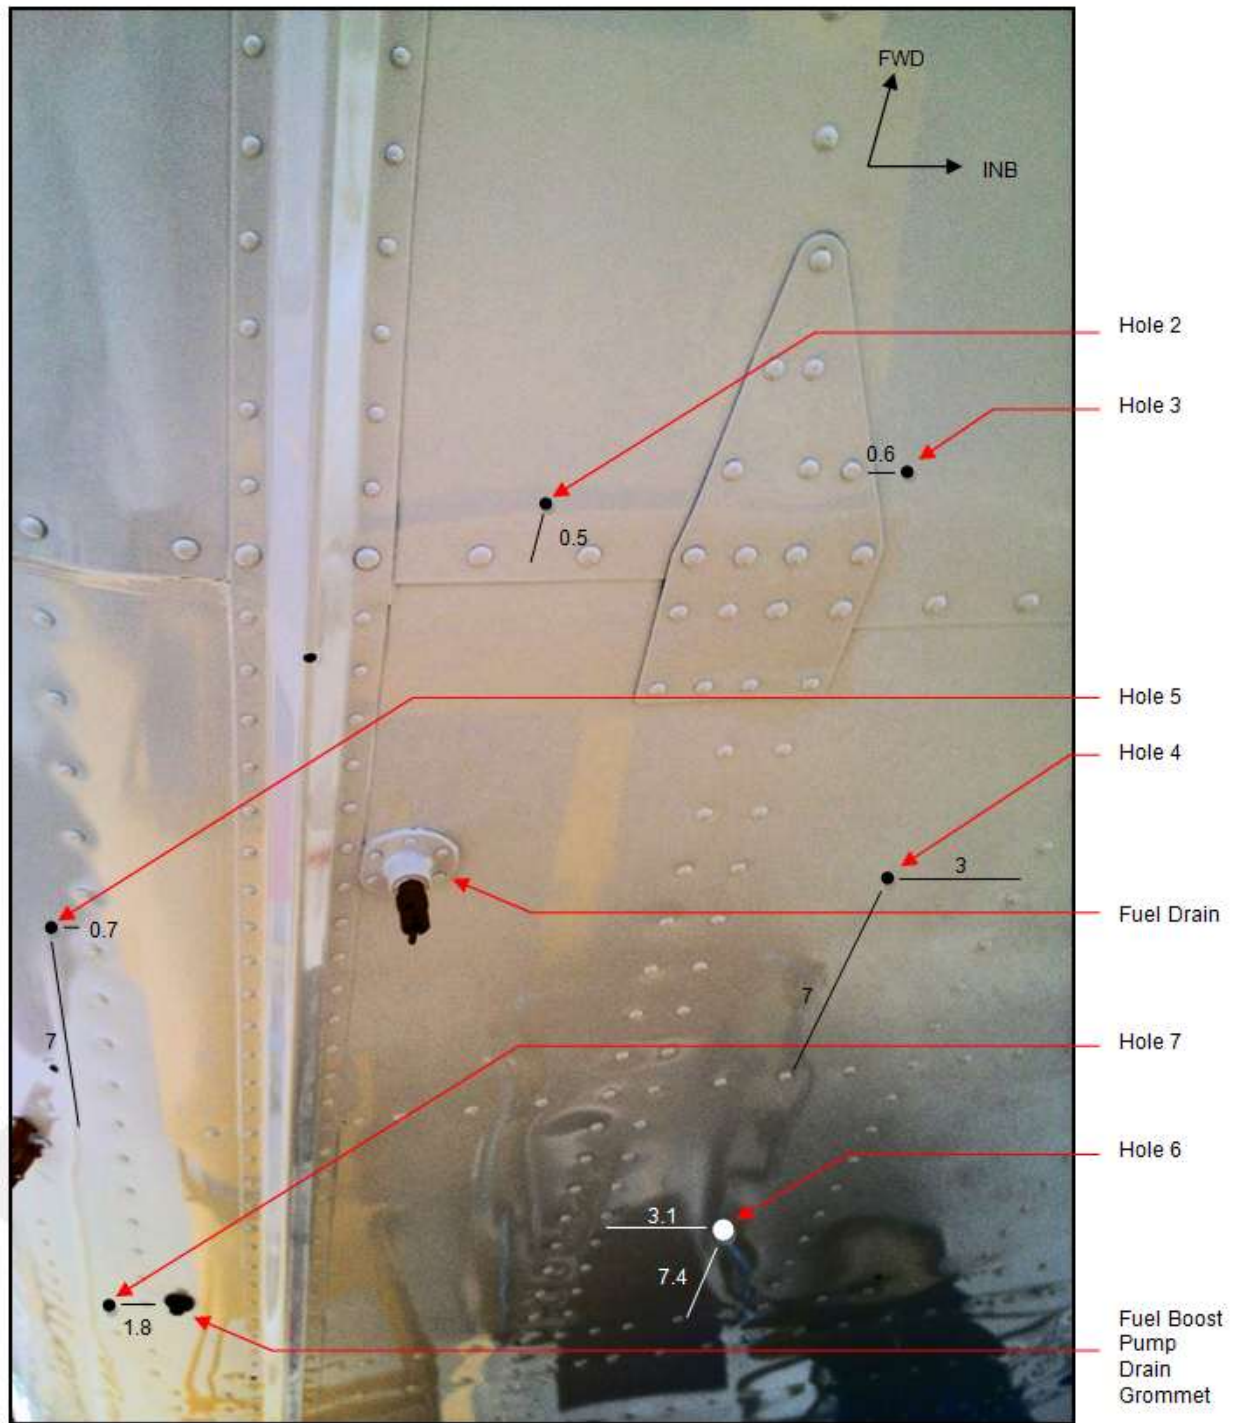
Hole Locations Viewed from Bottom of Belly Skin (Dimensions in inches)
